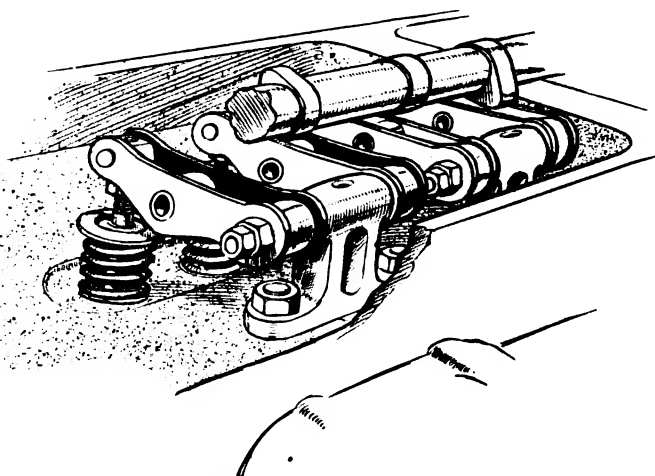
VALVE OPERATING DETAILS OF THE 18-HP. FOUR-CYLINDER PHOENIX ENGINE
